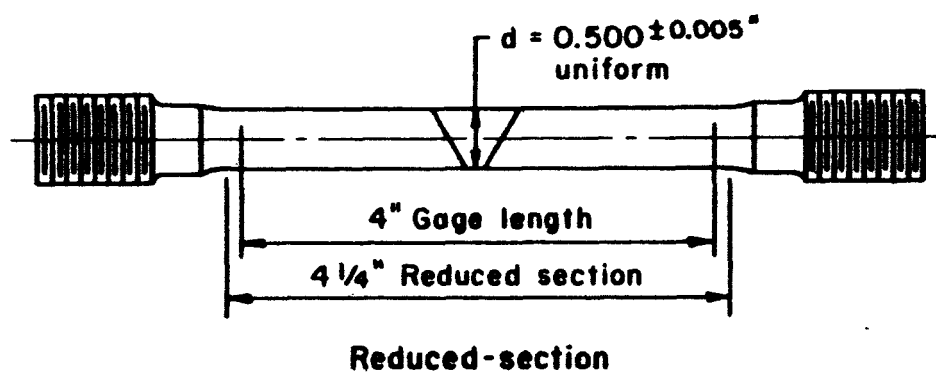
Tensile Specimens from Groove-Welded Plate.
